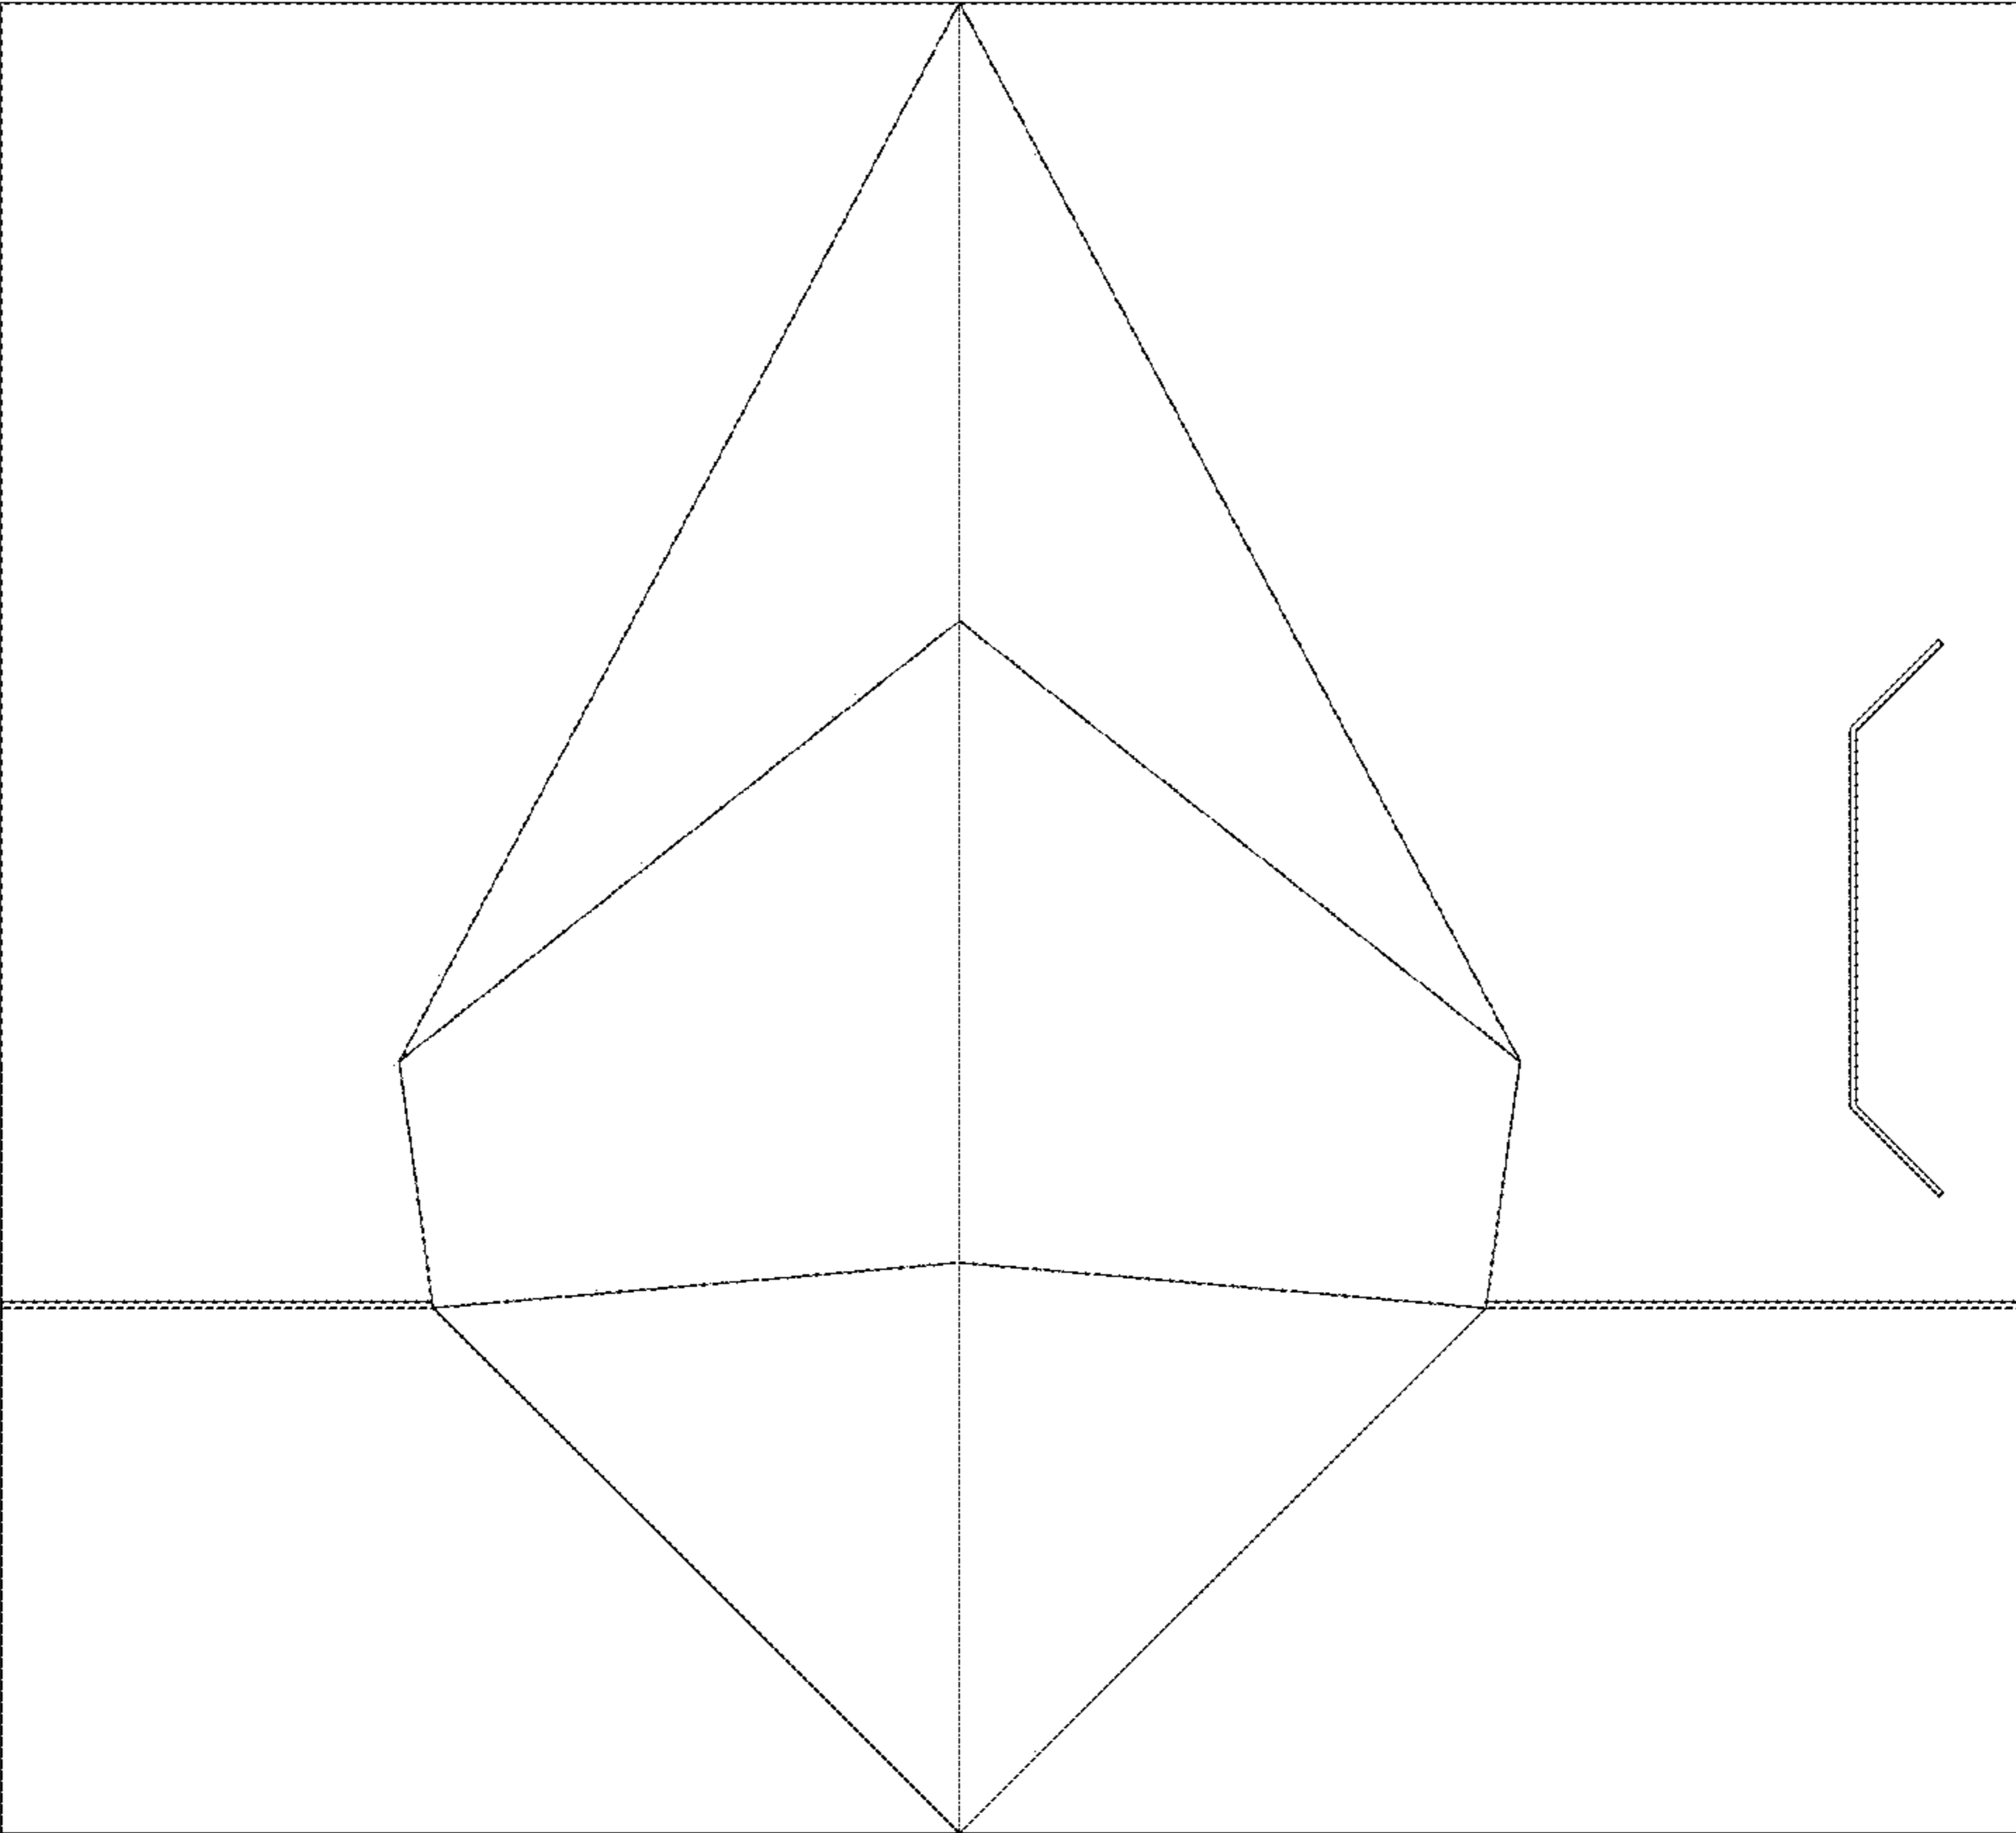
is a top perspective view of a foldable support for mobile devices in an unfolded configuration;
